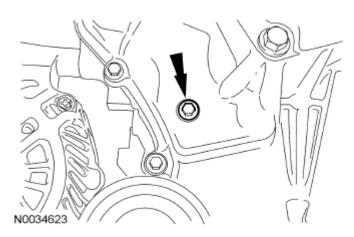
Locating Upper Front Cover Timing Hole Plug Courtesy of FORD MOTOR CO.
